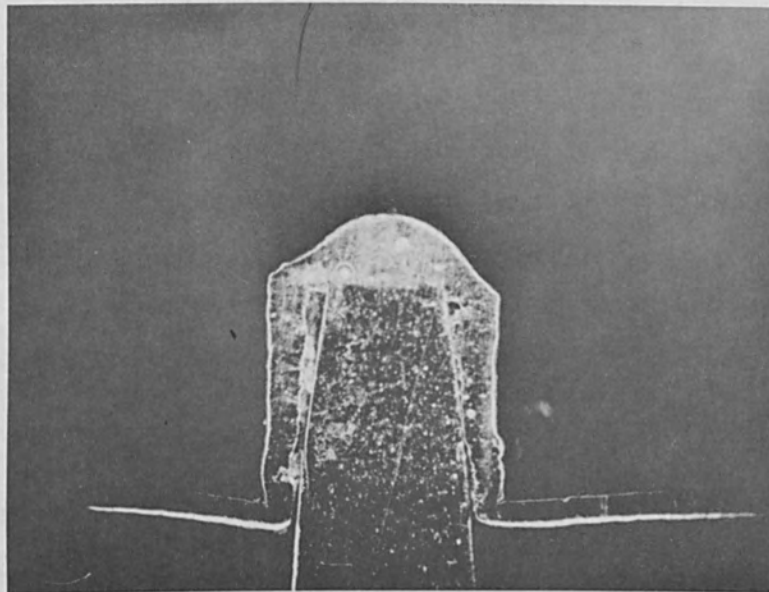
Laser weld of nickel wire to Polyweld.
